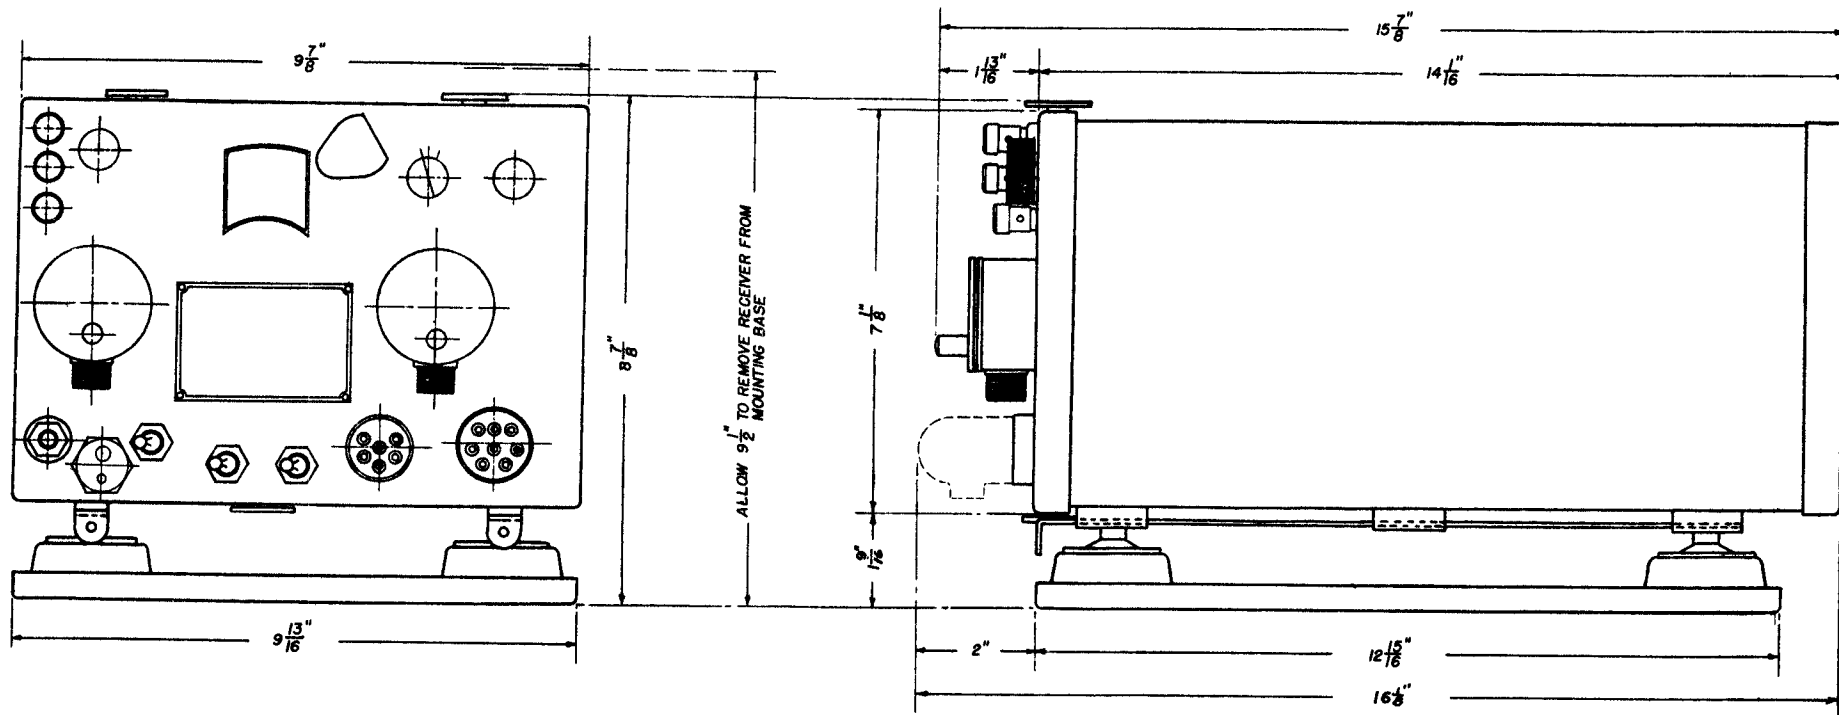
TYPE RA-1B RECEIVER UNIT OUTLINE DRAWING
